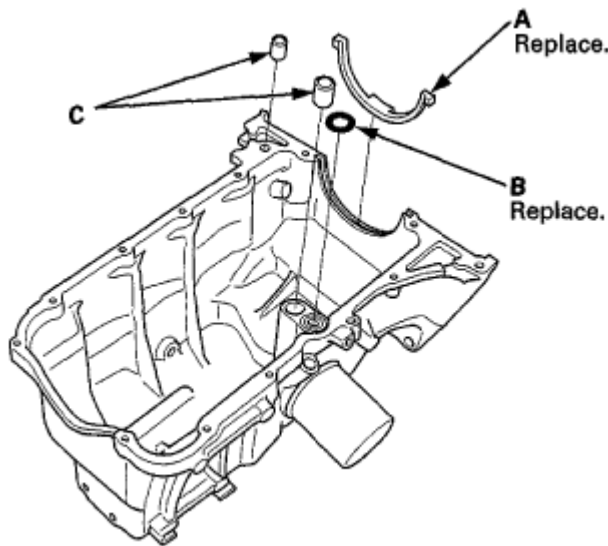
Identifying Oil Pan Gasket, O-Ring And Dowel Pins
